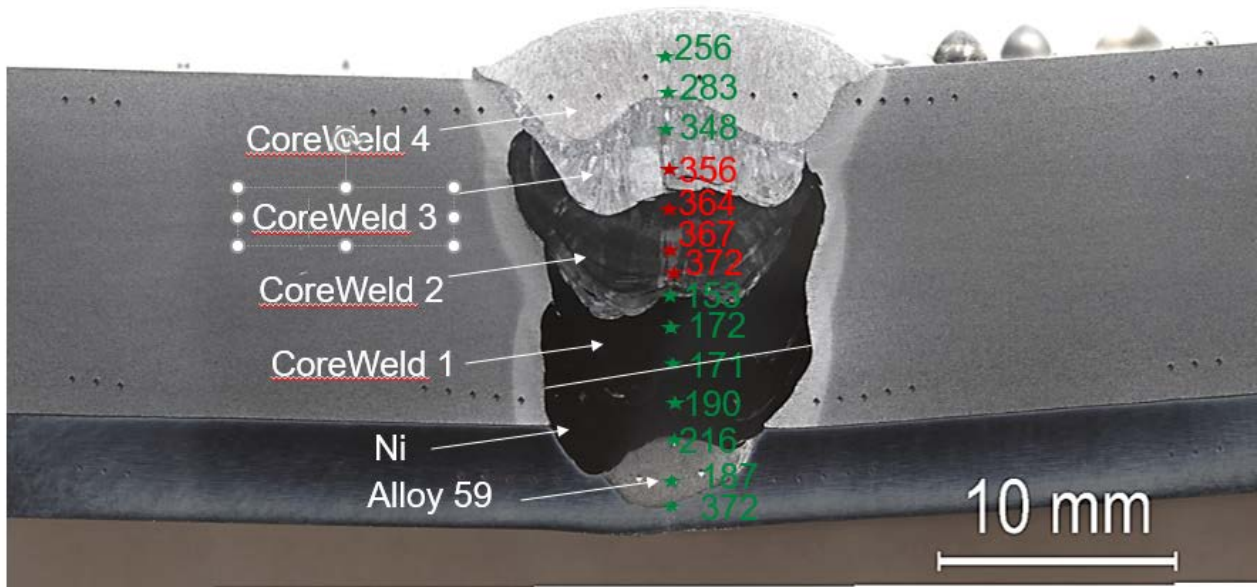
Macro of the clad pipe weld with alloy 59 in the root, Ni-1 (1st filler) and then filled up with CoreWeld.
